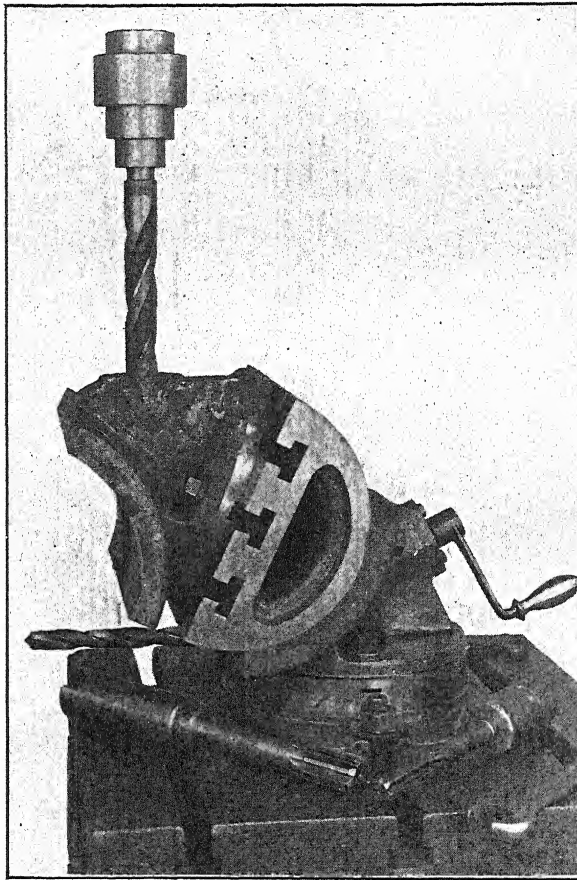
The Graham Manufacturing Co. Drill Vise Provided with a Bushing Plate, Bushing, and Taper-Shank Drill.
